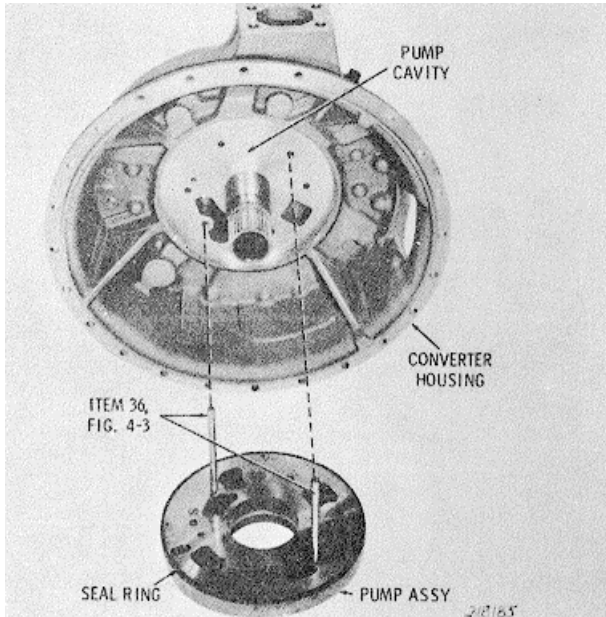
Installation position of oil pump assembly (housing with 2-bolt cover)
